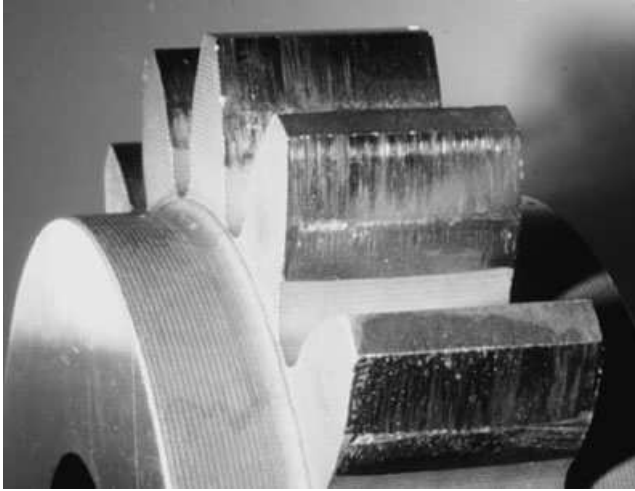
Tooth flank with typical wear (PT-C-type, pitting test).
